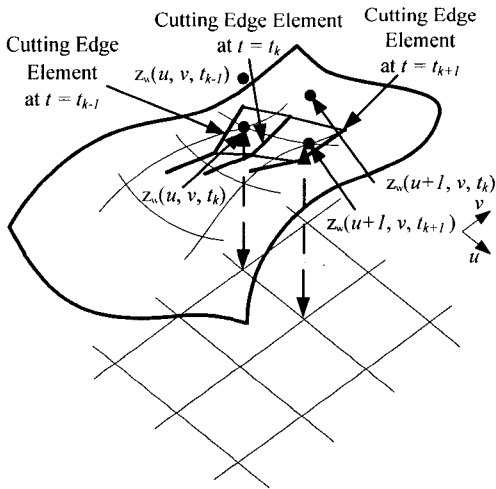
Z-map representation of workpiece and cutting teeth edge
